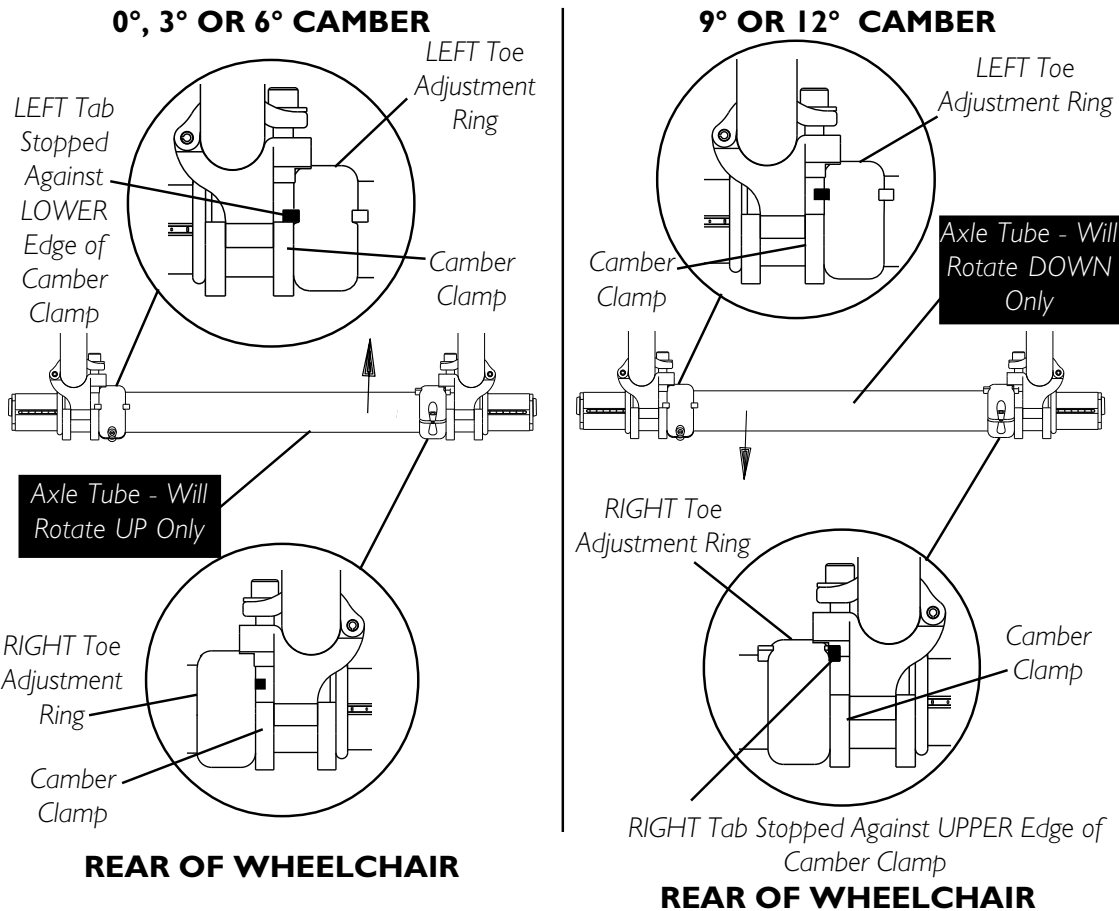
ADJUSTING TOE IN/TOE OUT
